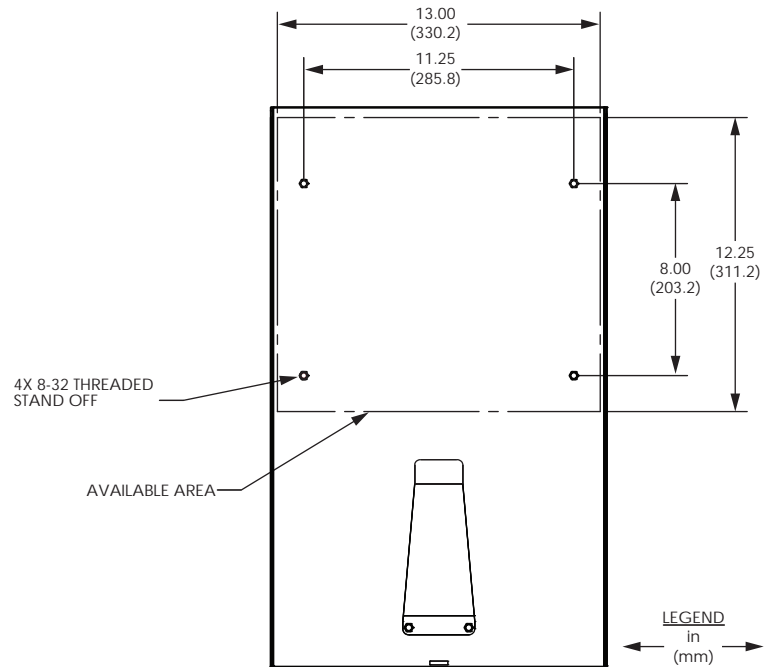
View of Inside of the Enclosure Door with Recommended Dimensions and Drill Plan for User-Supplied Accessory Panel (Lift-To-Open Enclosure)
